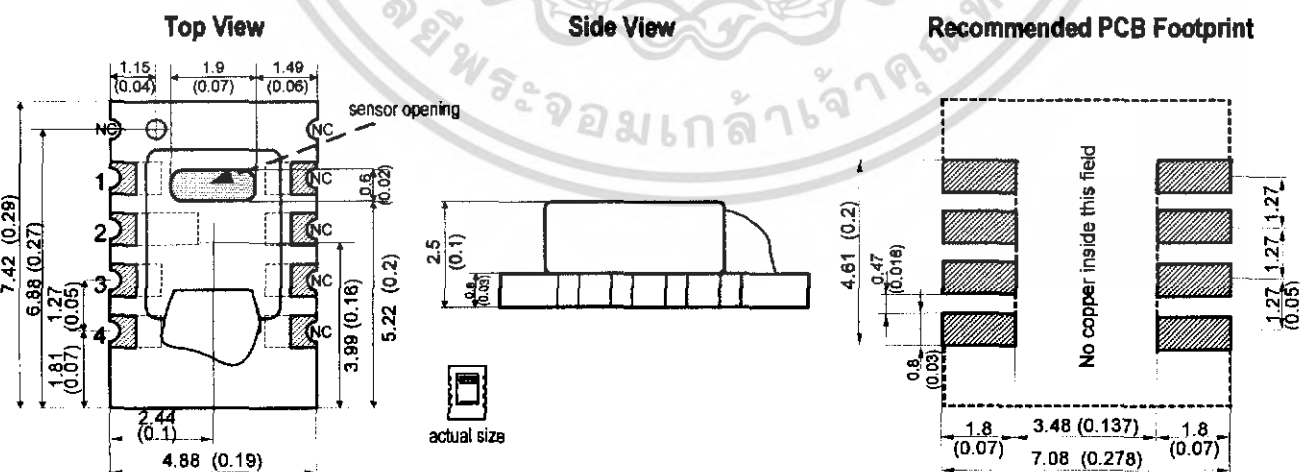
SHT1x drawing and footprint dimensions in mm (inch)
